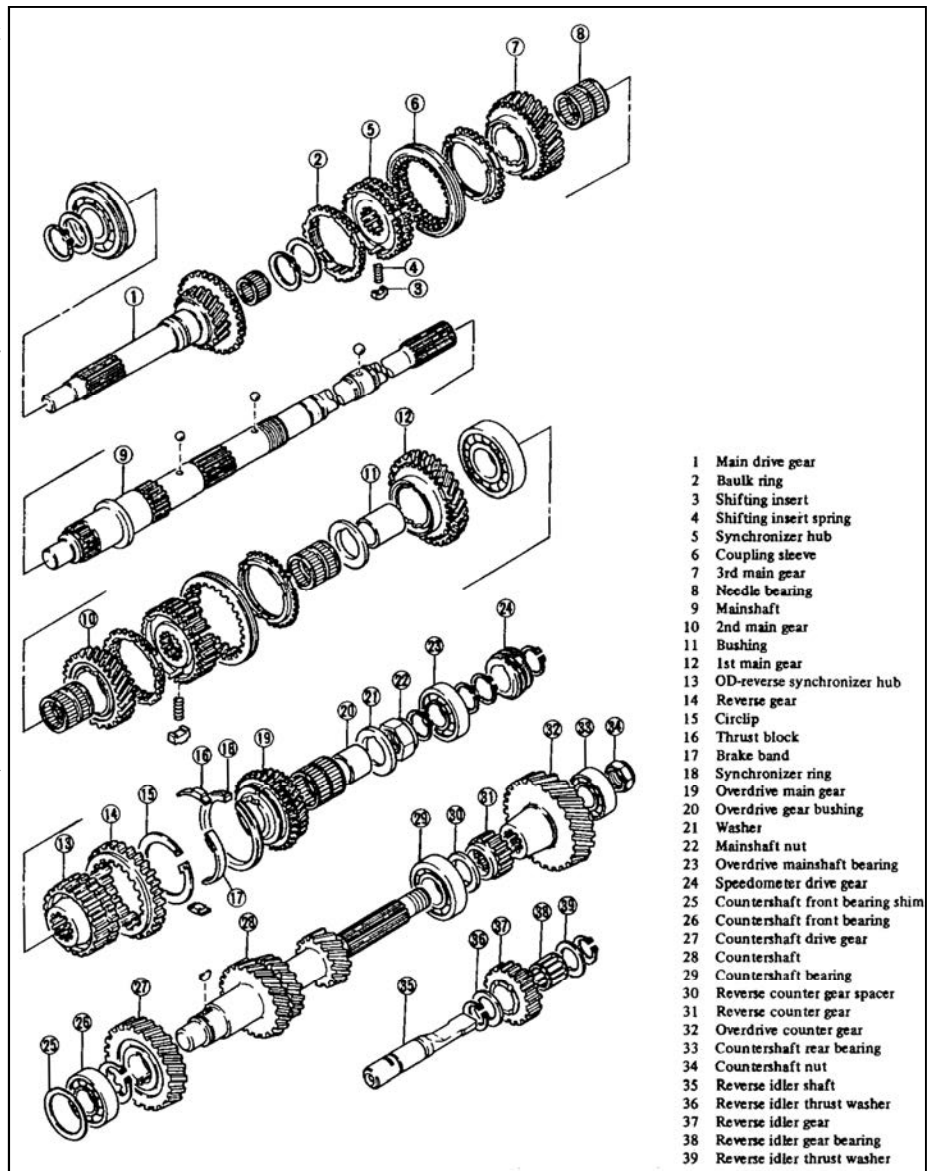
Exploded view of the FS5W71 main and countershafts, including gears, synchronizers, and bearings.
